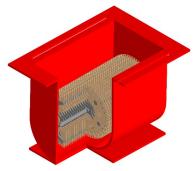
Model of a device for simultaneous processing of parts with positioning without rigid fixation, placed in a machine tool container
